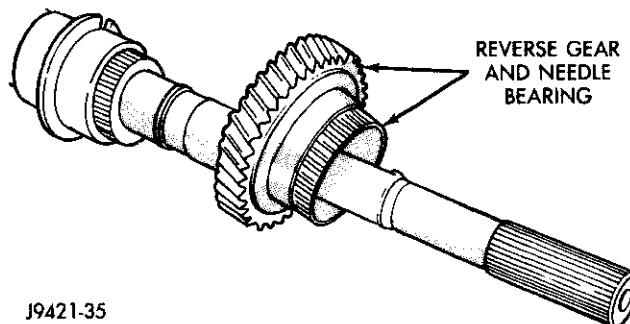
Reverse Gear And Needle Bearing Removal ASSEMBLY
